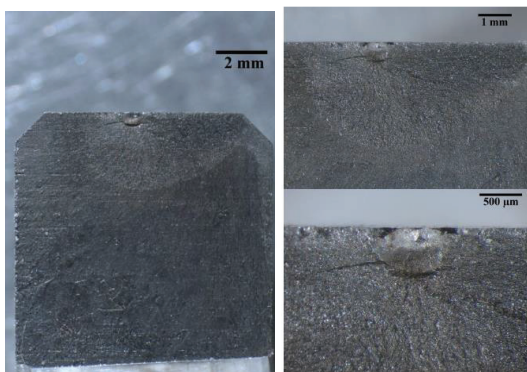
Stereomicroscope images of the fracture surface of ring B1
